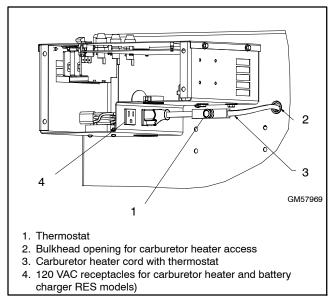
17/18 kW Carburetor Heater Location (air intake side of generator set)
